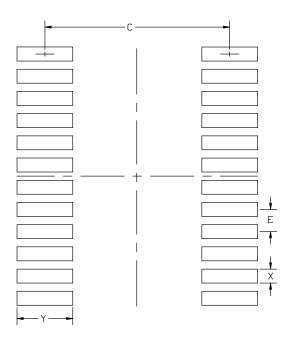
QSOP24 PCB Land Pattern Drawing
